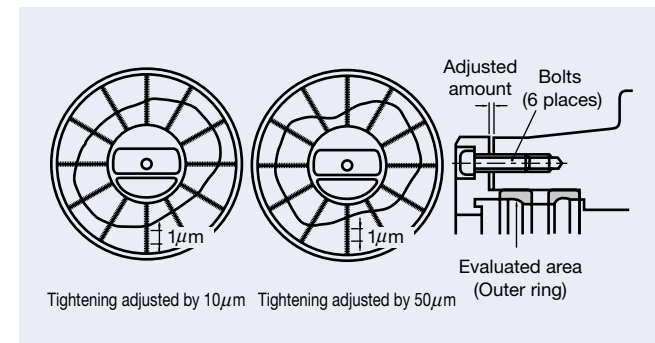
Deformation of the Outer Ring of a Double Row Cylindrical Roller Bearing Caused Excessive Tightening
